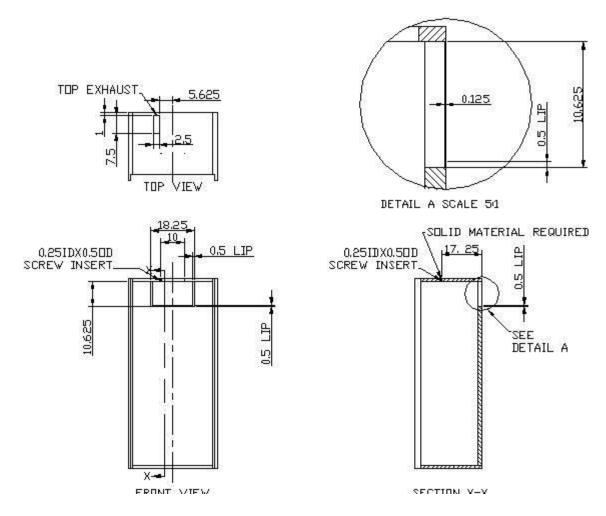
CUTOUT AND HOLE DIMENSIONS
